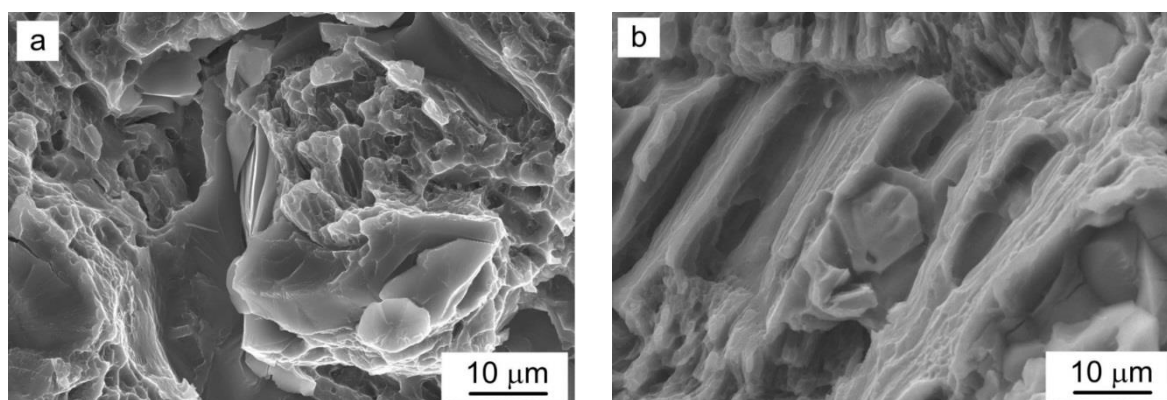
Fracture surface of as-cast specimen failed during the tensile test a) quasi-cleavage fracture micromechanism, b) detail of shallow dimples close to cleavage facets.
